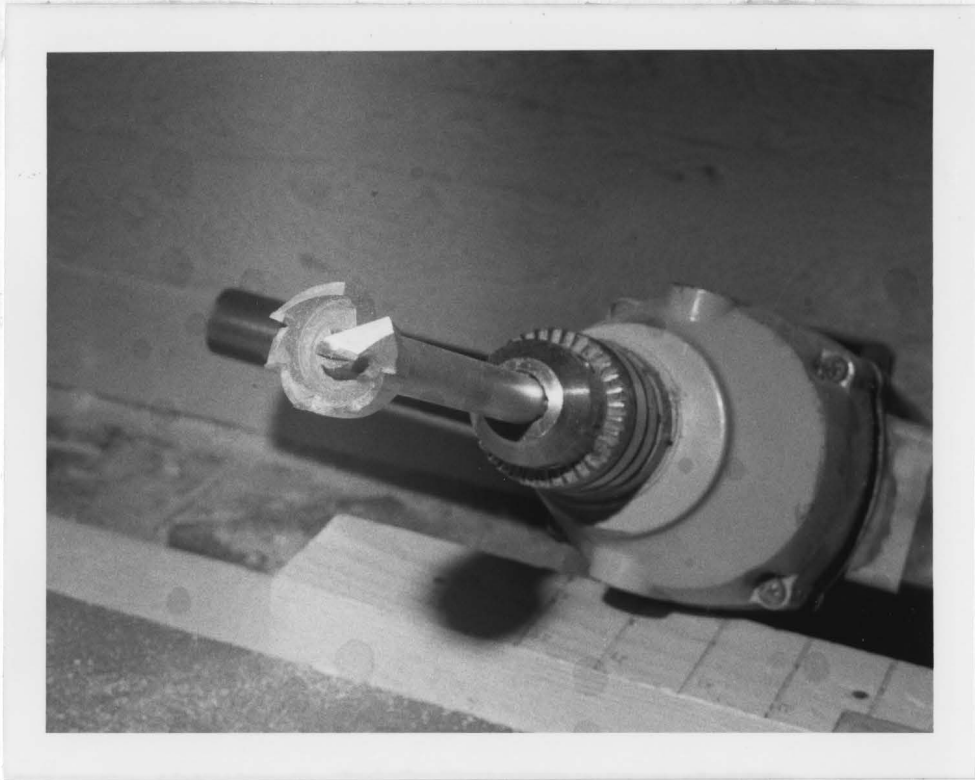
The power drill and carbide-tipped Forstner bit used for rough-machining notches with $D > 0.75$ in.
